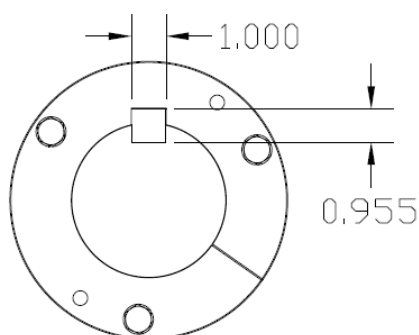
TA8407 x 4-7/16 bushing key dimensions
